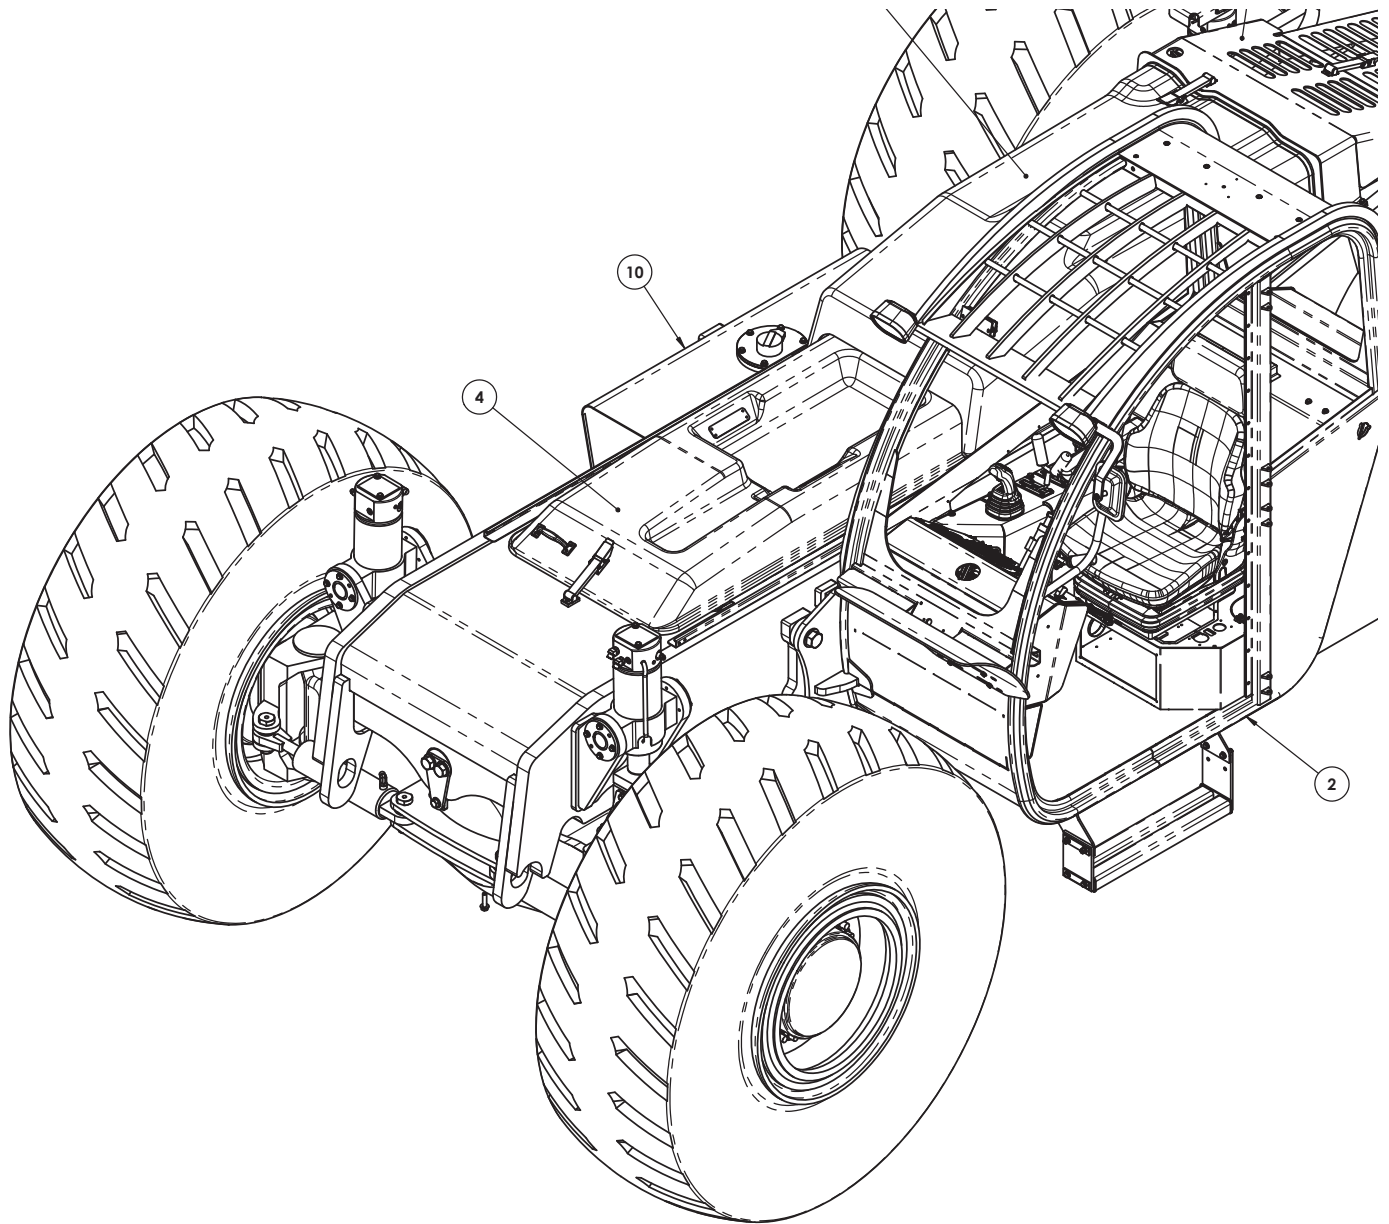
CHASSIS ASSEMBLY - CAB & COVERS (32002-000)
